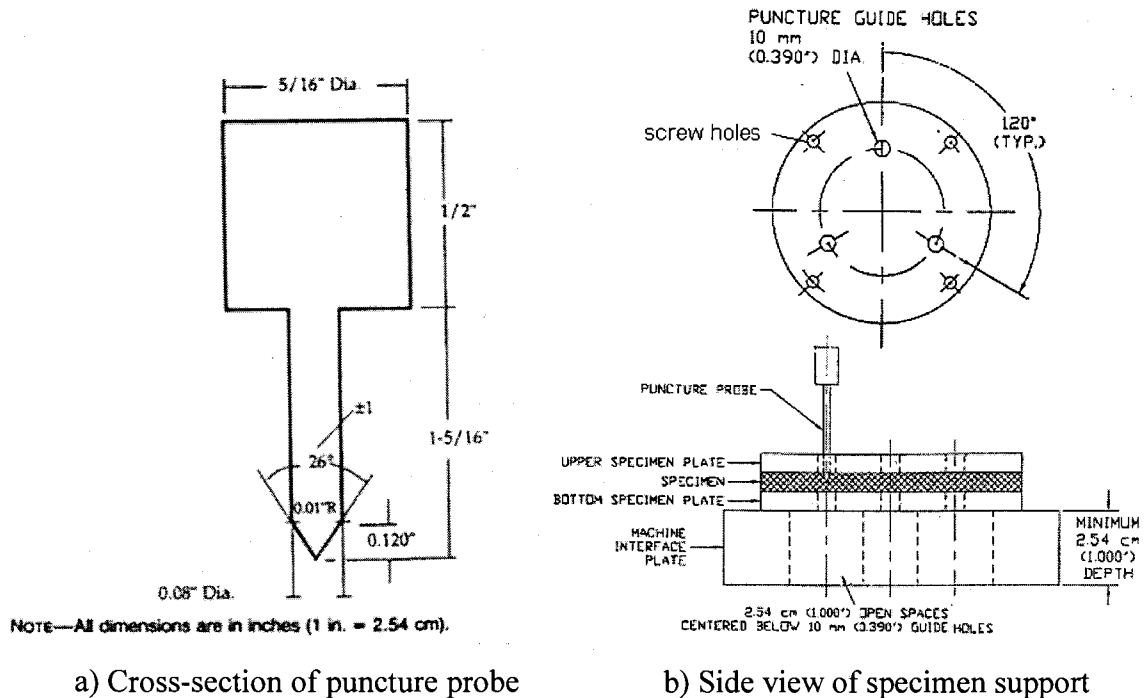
Puncture test probe and specimen support of ASTM F1342 [9].
